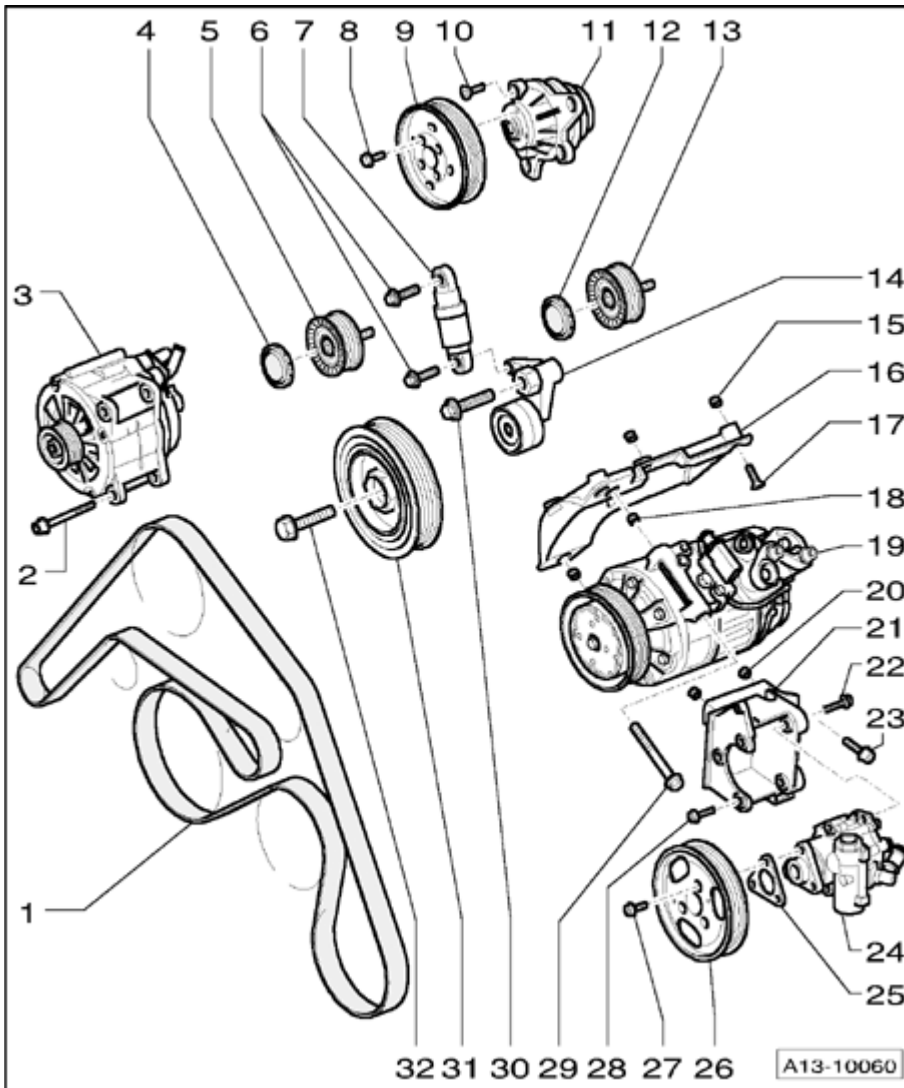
Power Steering Pump Ribbed Belt Drive, Generator And Air Conditioning, Assembly Overview
